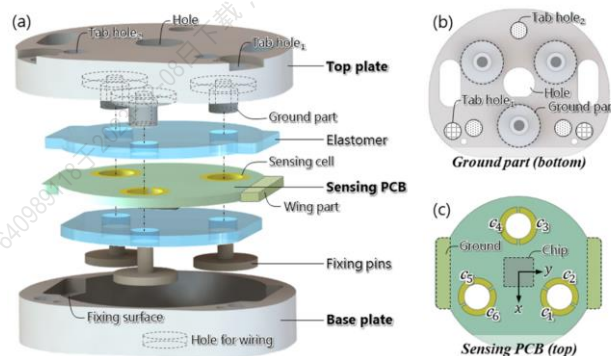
Configuration of the proposed six-axis F/T sensor. (a) Exploded view of all the assembly parts of the sensor. (b) Bottom of the ground plate. (c) Top of the sensing PCB.
